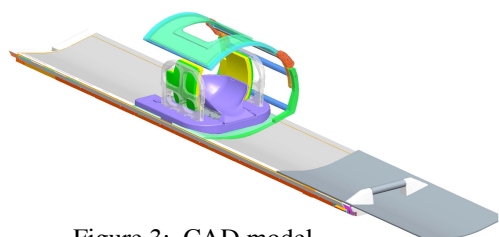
CAD model showing paddles (yellow-green) installed about head holder (purple) inside TX coil (blue-green)
